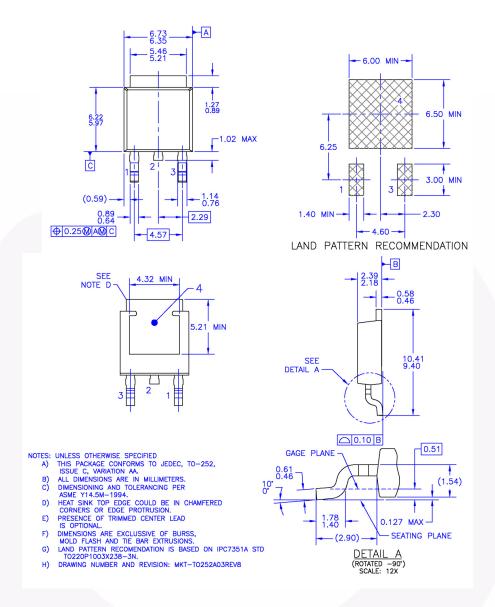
TO-252 3L (DPAK) - TO252 (D-PAK), MOLDED, 3 LEAD, OPTION AA&AB
